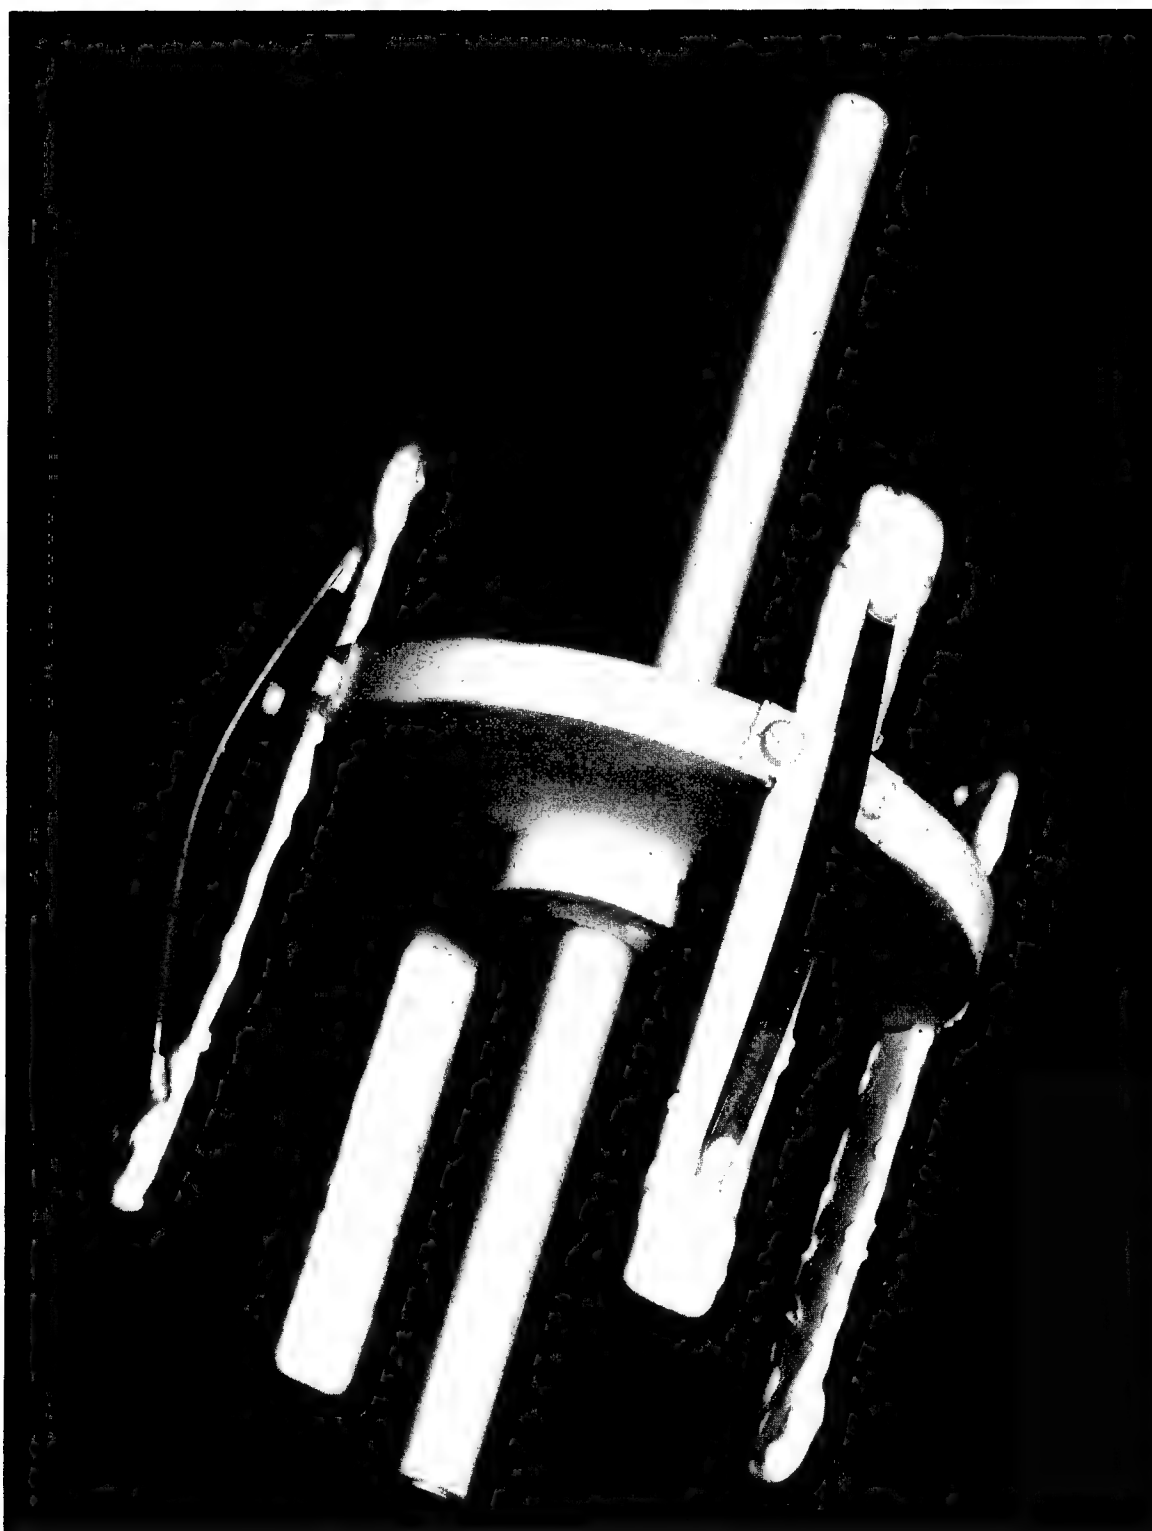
Coated Bend Fixtures Mounted on Teflon Impeller
